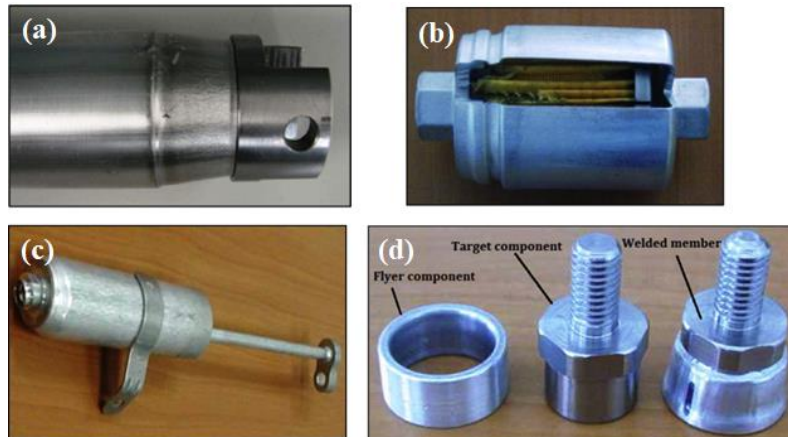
Components of automotive sector obtained with MPW: (a) drive shaft (Al/steel joint), (b) fuel filter (Al/Al joint), (c) automotive A/C receiver-dryer, (d) automotive earth connector [34].
